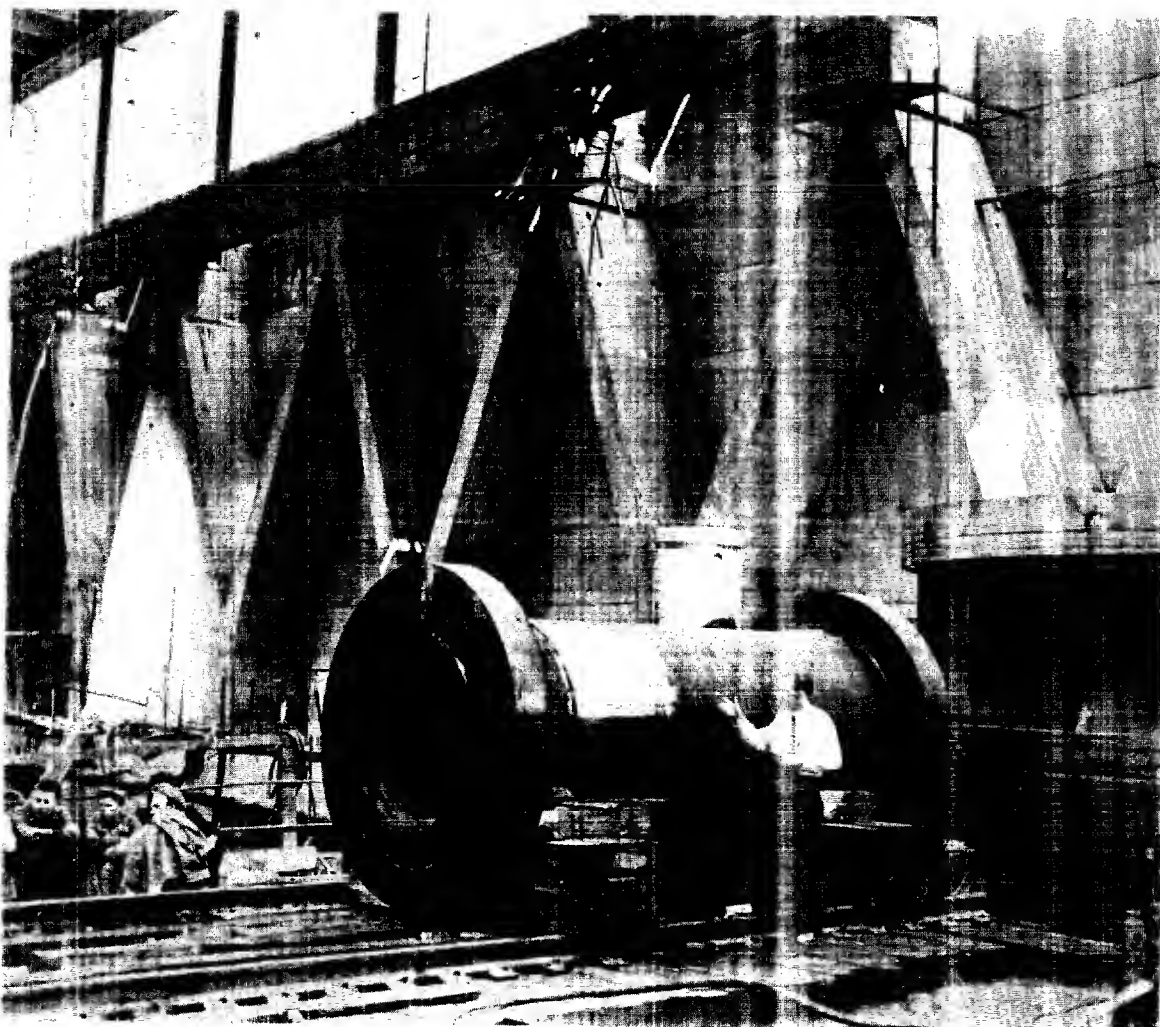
Hollow welded shaft for 225,000-kv Bratsk generators. The powerhouse wall and roof are of precast concrete.
